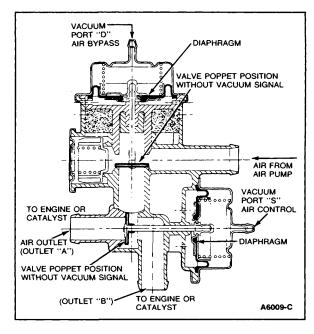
Valve Assembly — Exhaust Air Supply Control (Normally Closed) Without Bleed
